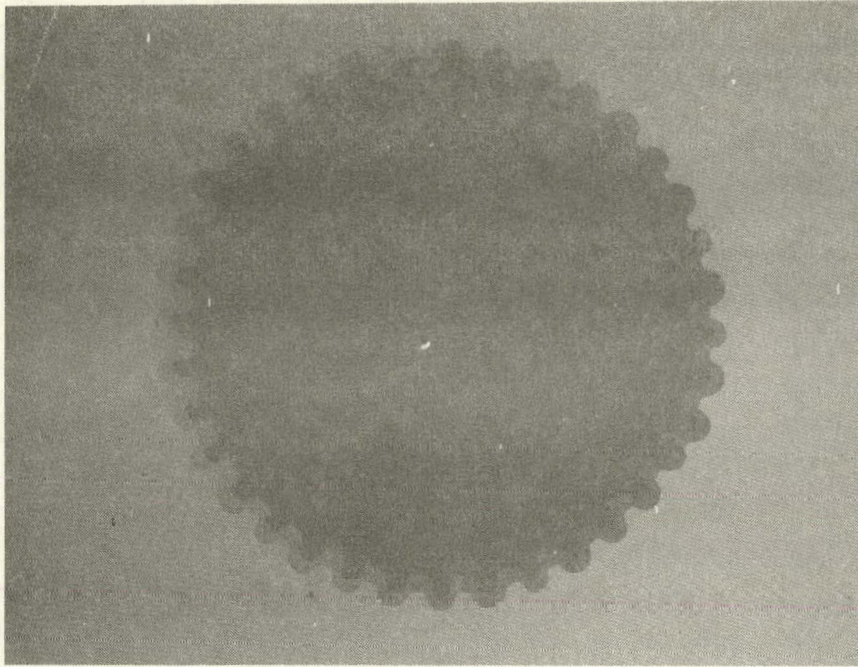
Figure B. Cross-section of 5052-0 Aluminum Tube After Isostatic Pressing at 60,000 psi (Mag. 3x)
